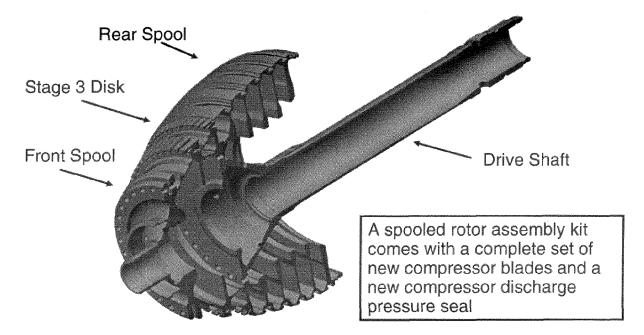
Redesigned Eight-Stage Compressor Rotor Assembly
